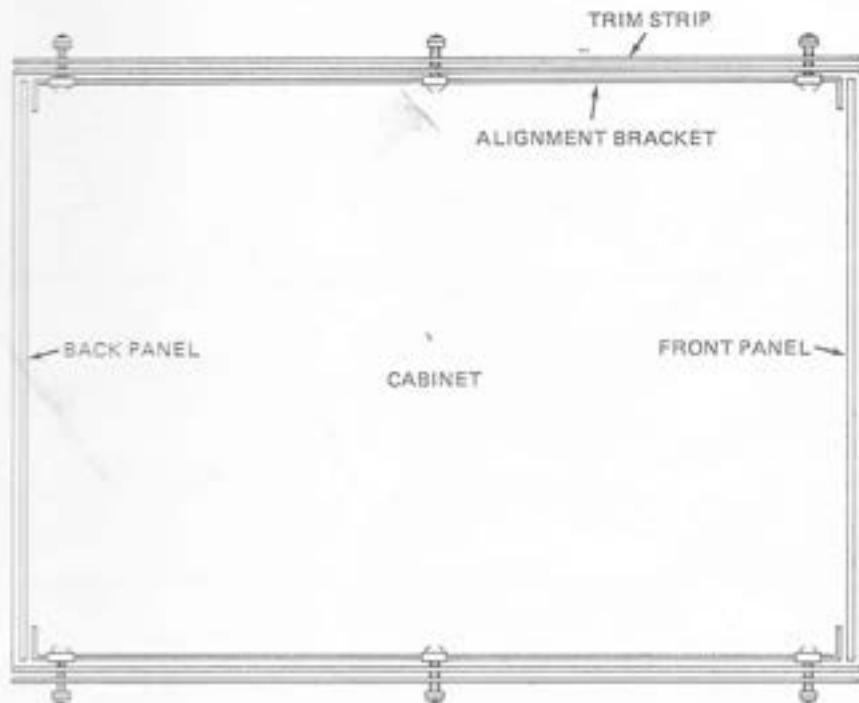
Mounting the trim strips and the alignment brackets on the cabinet bottom.
